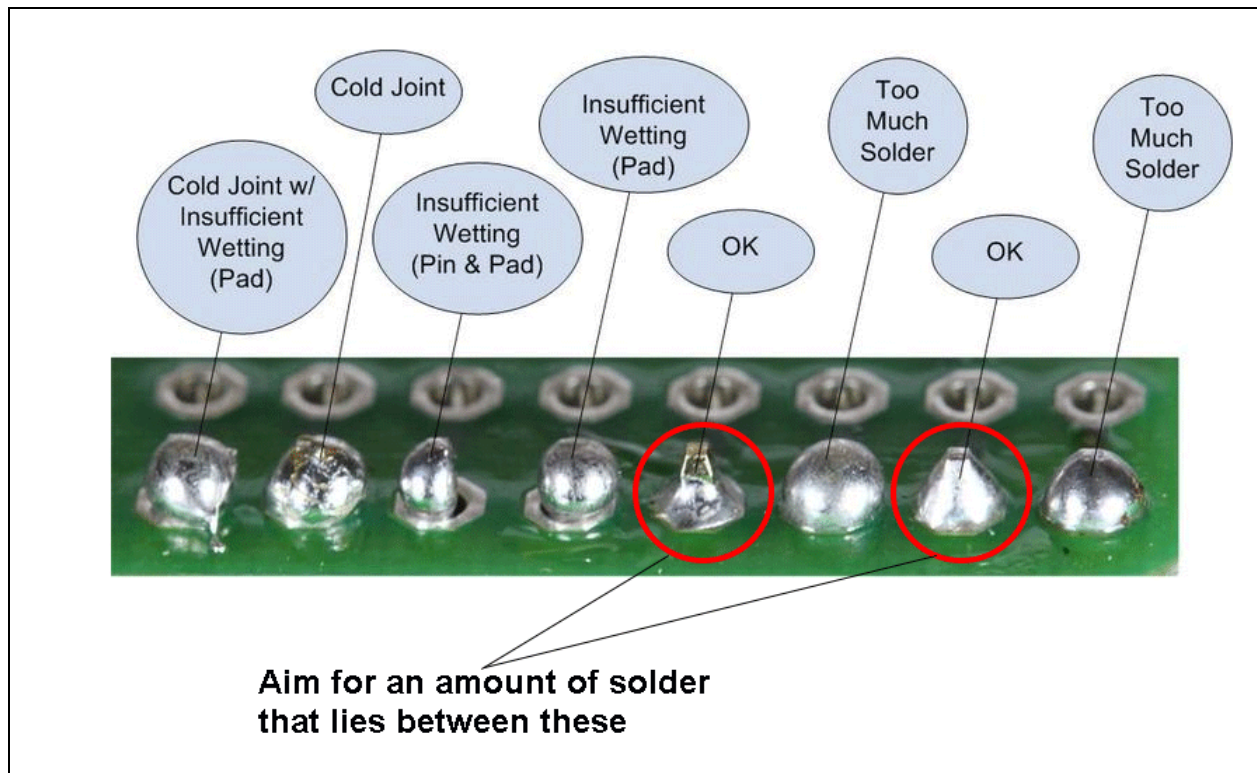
Common results from soldering through-hole component leads. Applying the correct amount of solder is critical for proper functioning of the solder joint.
